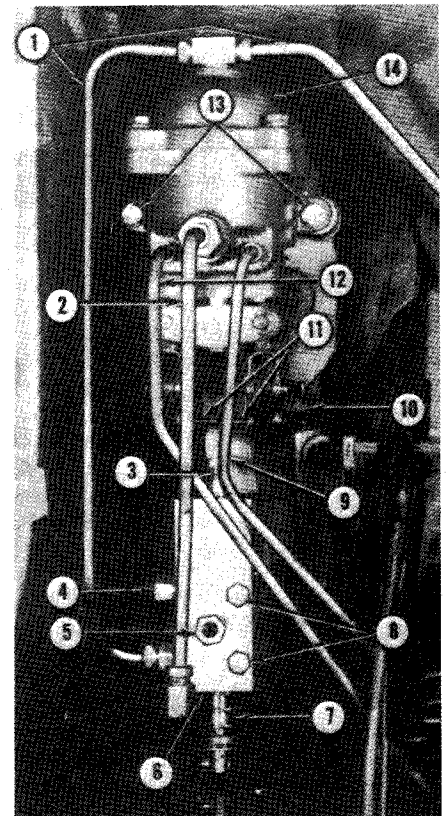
View of power brake valve and differential lock valve on Model TW-30.
